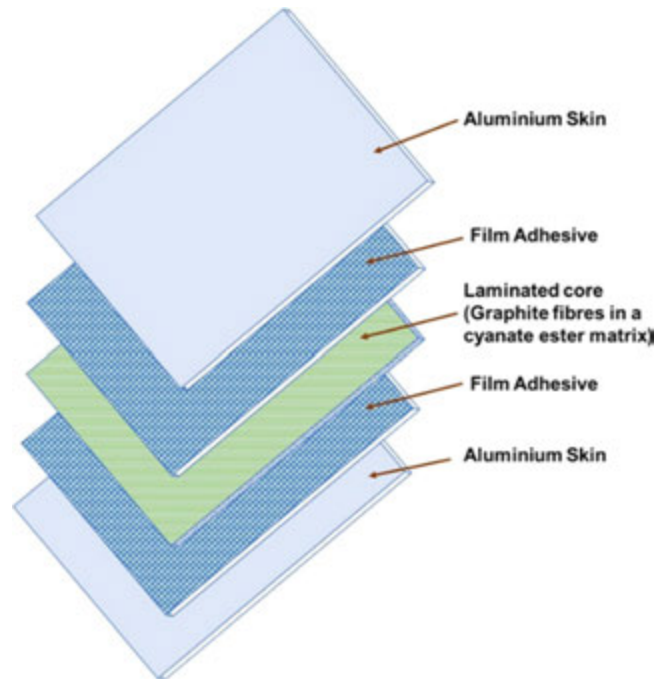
Lightweight laminated composite heat sink developed for printed circuit boards. Redrawn from Holz, J.M., Niemeyer, L., Puckett, D., 2000. Composite-Material Heat Sink for Printed-Circuit Boards, Technical Support Package. GSC-14142. Goddard Space Flight Center. Available at: <https://www.techbriefs.com/component/content/article/tb/techbriefs/materials/6720>.
